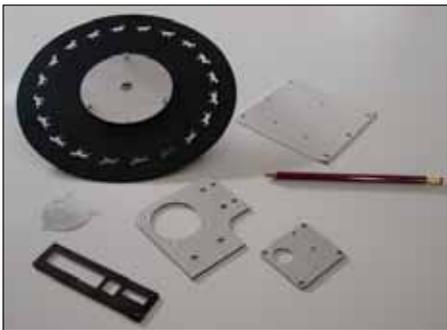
Cut samples include: 1.2 mm aluminium, 0.2 mm tinned steel, 0.5 mm & 2.0 mm anodised aluminium Courtesy of Newson Engineering NV.
